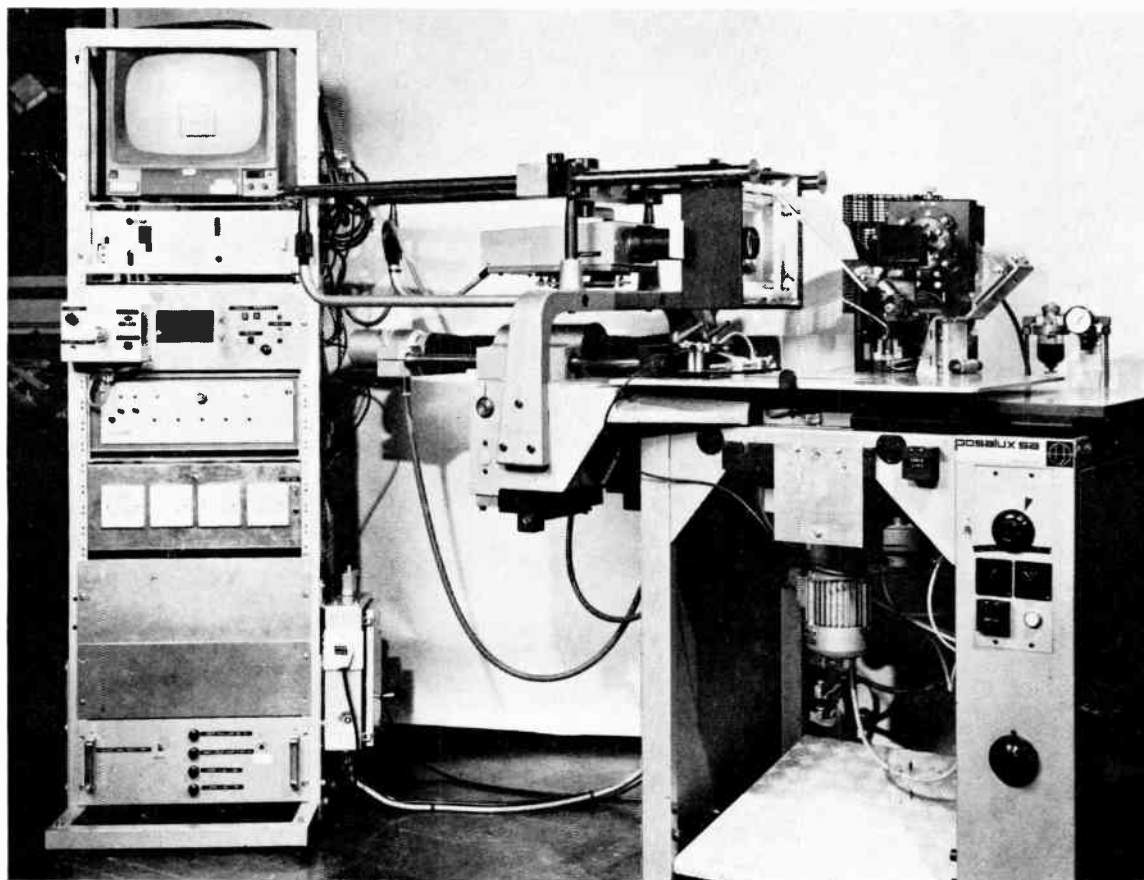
Automatic visually controlled printed circuit board drilling machine.
